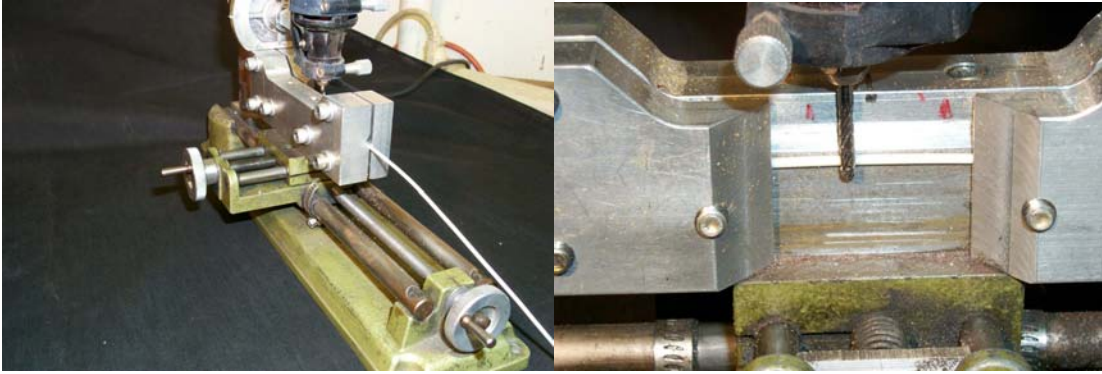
Showing Two Views of a Wire Clamped in Abrasion Test Fixture
